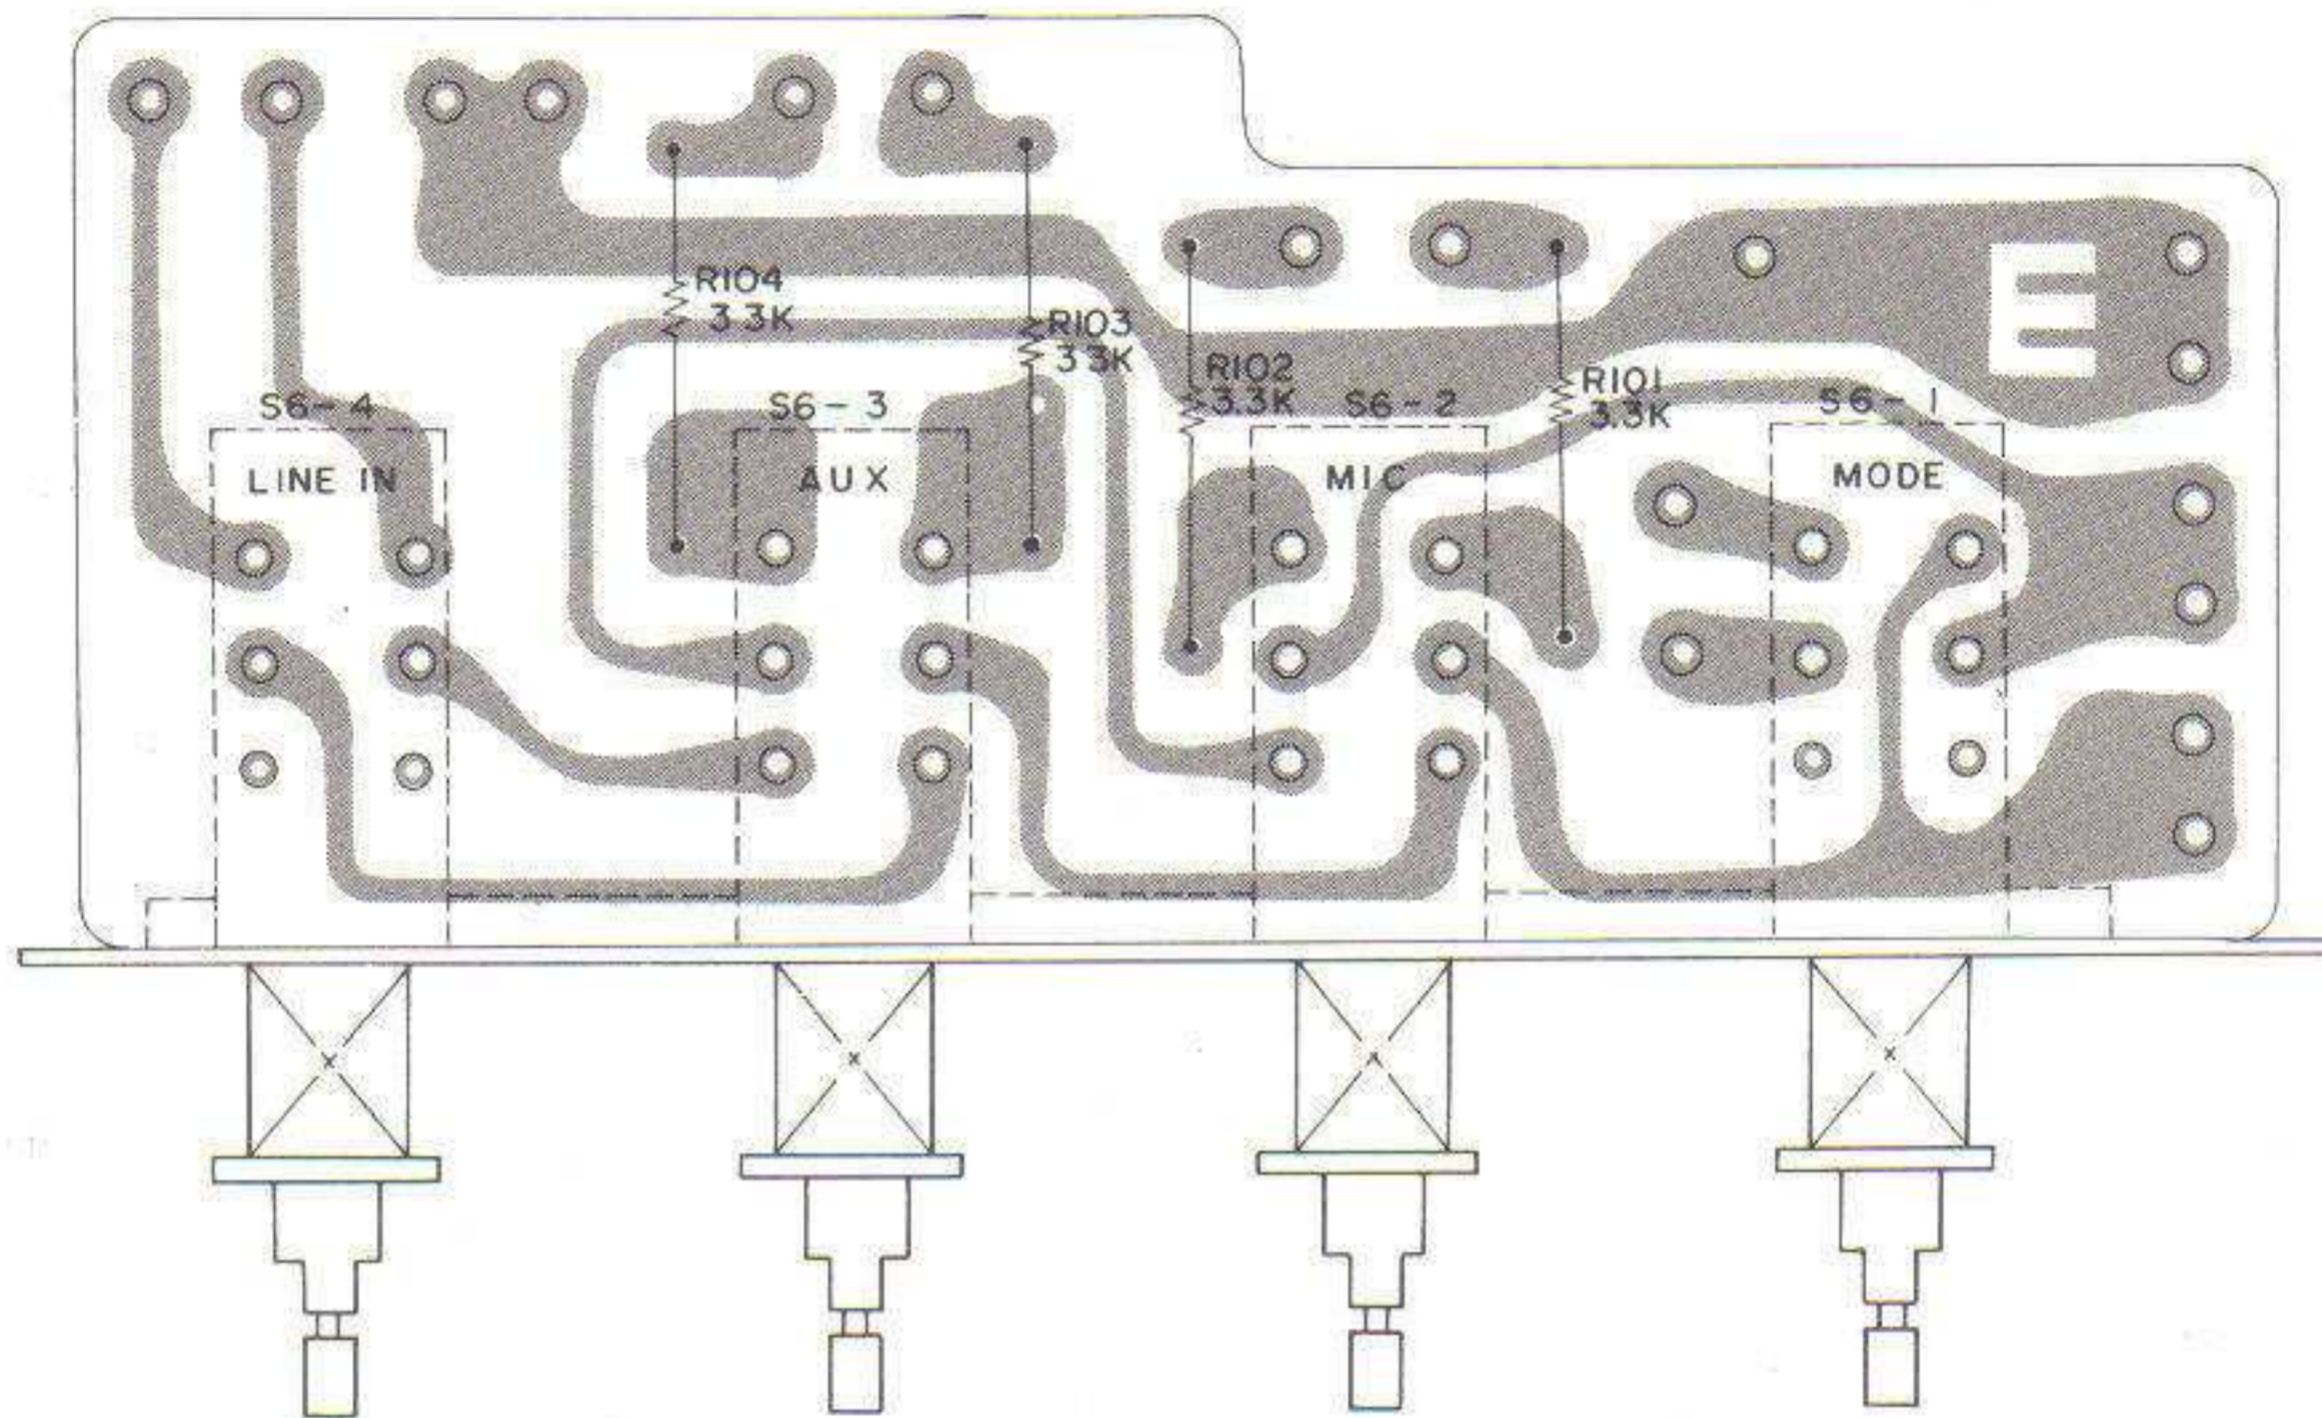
Bottom View of Push Switch P.C. Board (For TZ)
